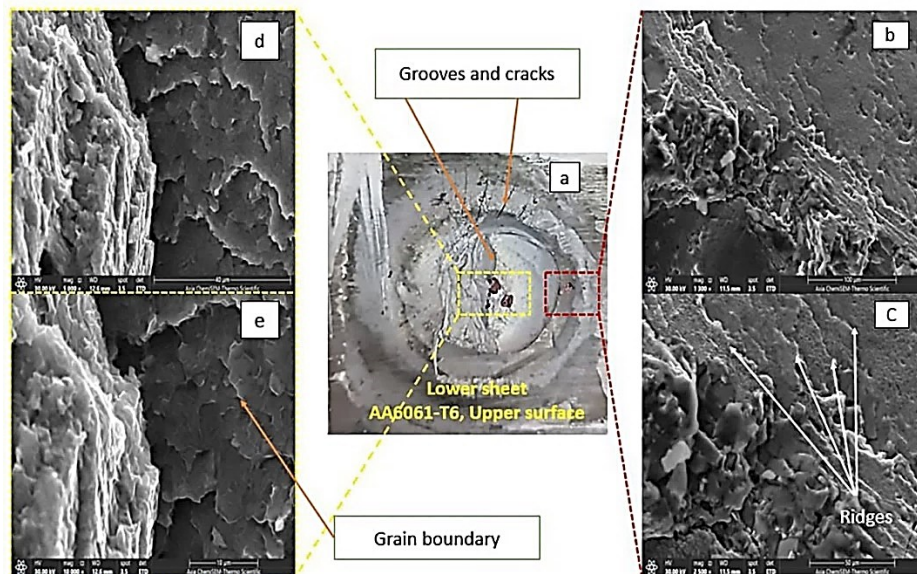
SEM Inspection for the Upper Surface of the Aluminum Sheet 6061-T6.
